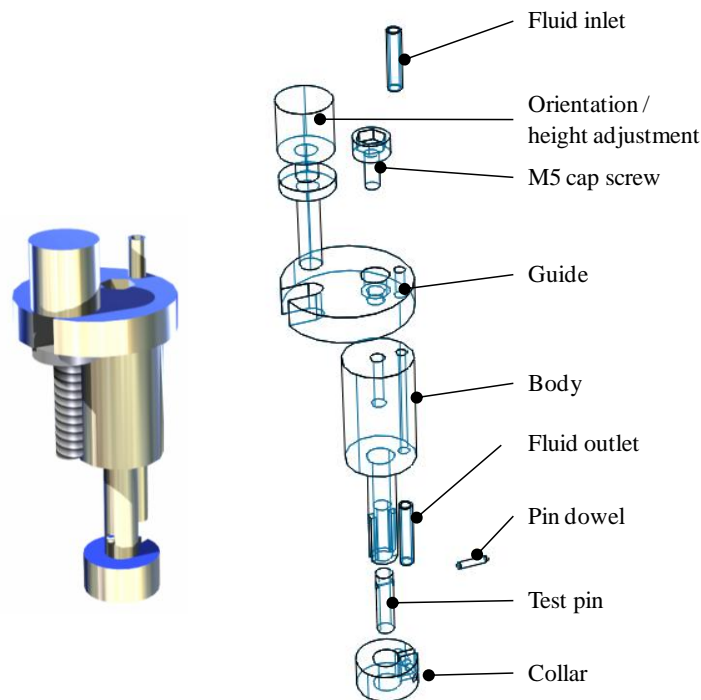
Exploded view of the test pin holder. All the modular components were designed from 304 stainless bar stock. This allowed the machining to be carried out on a single lathe, greatly simplifying the manufacturing process.
